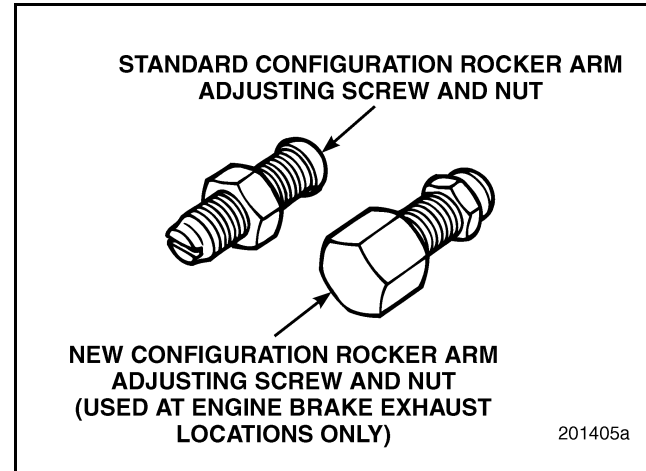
Rocker Arm Adjusting Screws and Nuts
